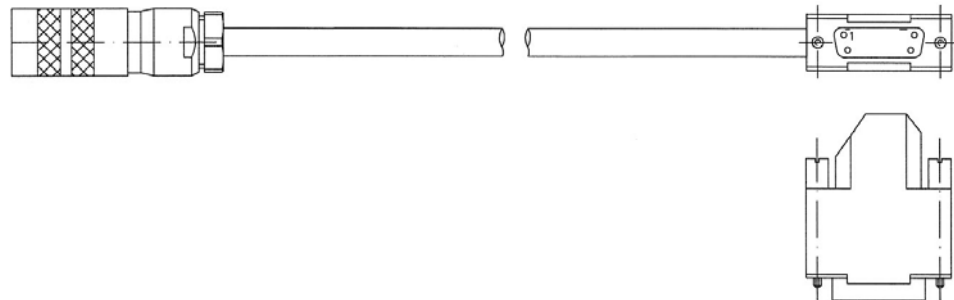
Pre-fabricated encoder cable 6SX7002-0AN30...
